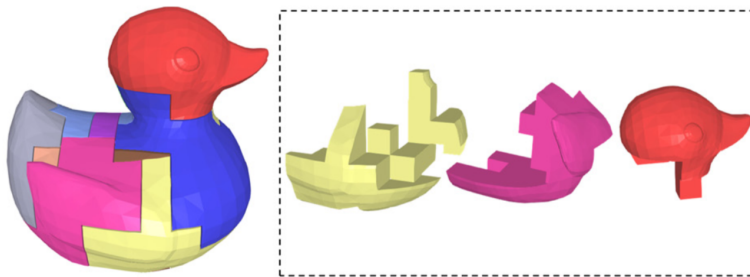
Assembled object on the left side, single pieces on the right side (picture taken from Song et al. [2015])
